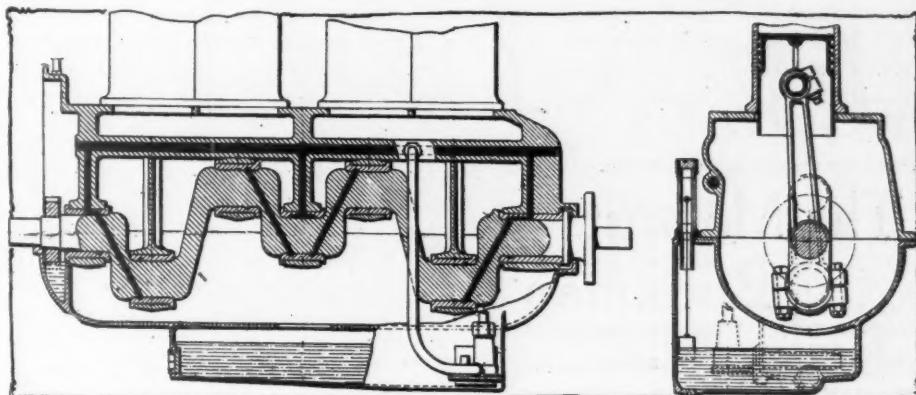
SHOWING COURSE OF OIL IN WISCONSIN MOTOR
